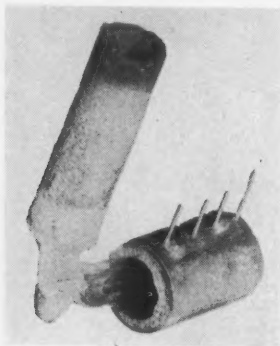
HYDRAULIC AND FRACTURE TEST CASTING.
